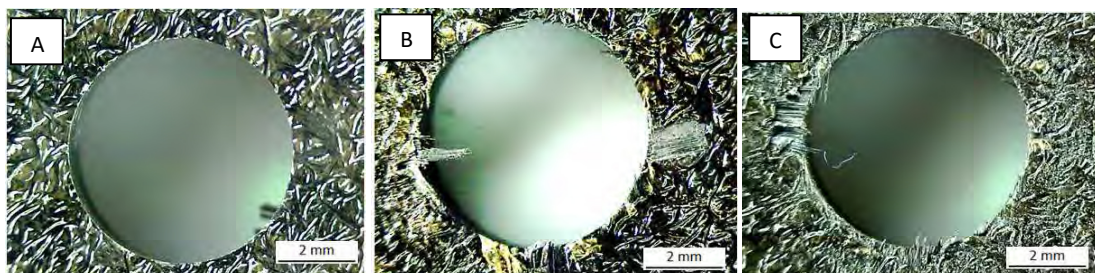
Push out delamination at the hole exit for new tool (A), flank wear tool (B) and honed edge tool (C) with point angle 118°, V = 50 m/min and f = 0.05 mm/rev.
